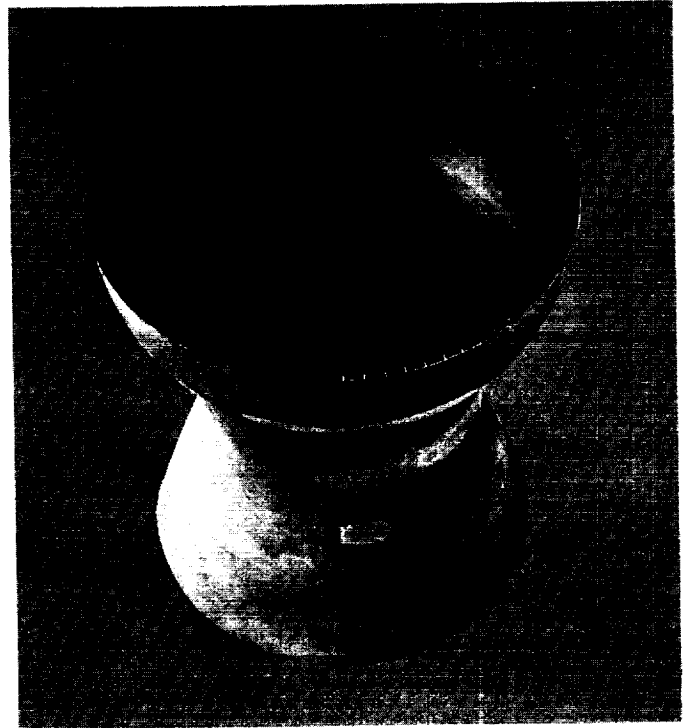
Braze Test Piece, Welded Rib Thrust Chamber
